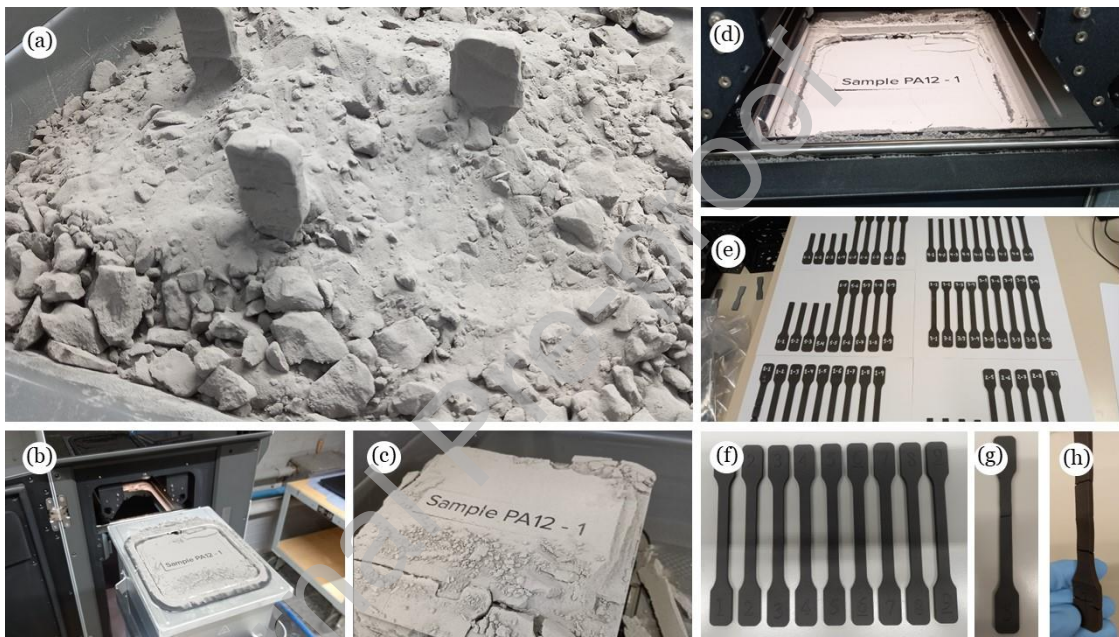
(a) Tensile specimens in cleaning process; (b,c,d) Build box with powder and printed parts; (e,f) Printed tensile specimens; (g,h) Printed Tensile Specimen with defects.
